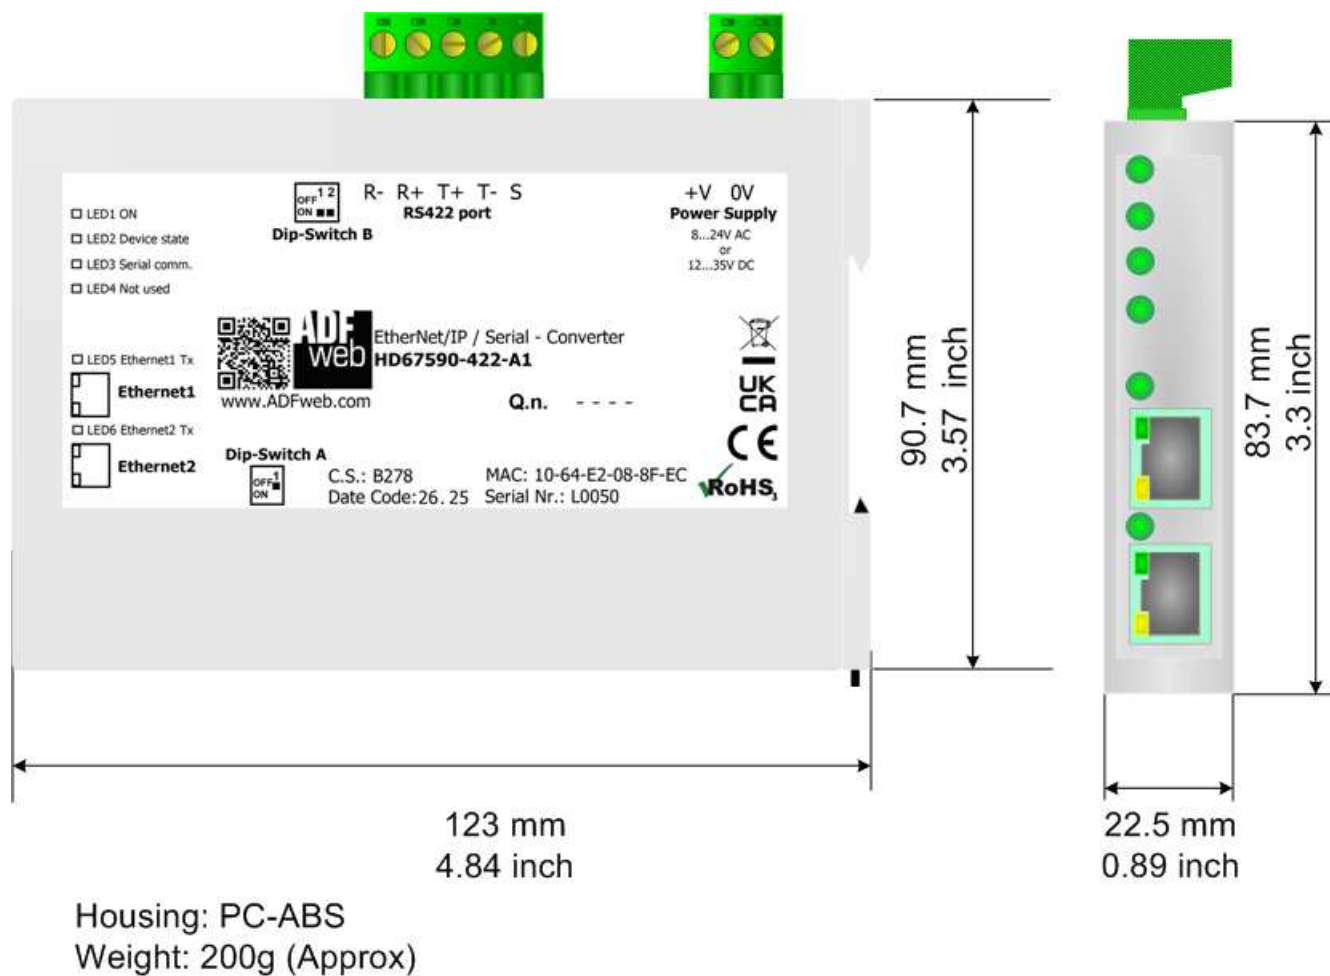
Mechanical dimensions scheme for HD67590-422-A1
